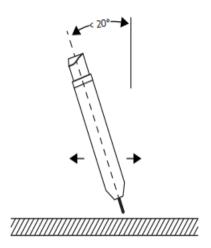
32 - Setting the welding torch in the welding direction. [14]
